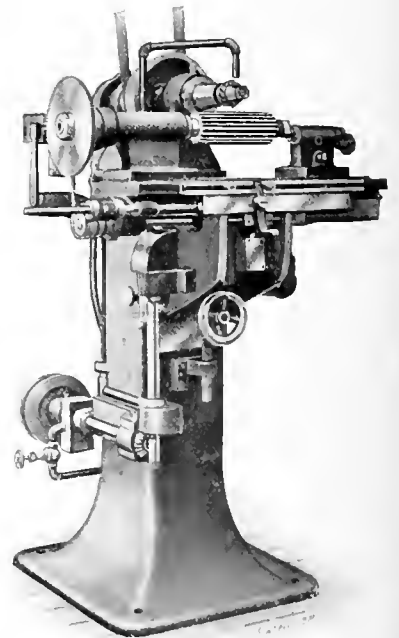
The Sloan & Chase Automatic Gear Cutter for Small and Medium Work.
